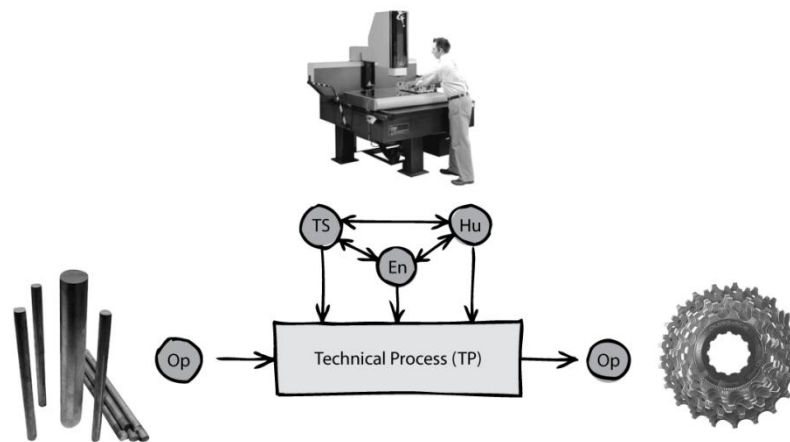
The processing step 'Fabricate GEAR WHEEL' viewed as a technical process [Hubka and Eder, 1987]. The element in the model are: the technical system (TS) is the CNC milling machine, the human system (Hu) is the human operator, the environmental system (En) is for instance the electrical power grid that is necessary for the machine to operate, the material operands (Op) are in input state the aluminium rods and in output state the machined gear wheel.
